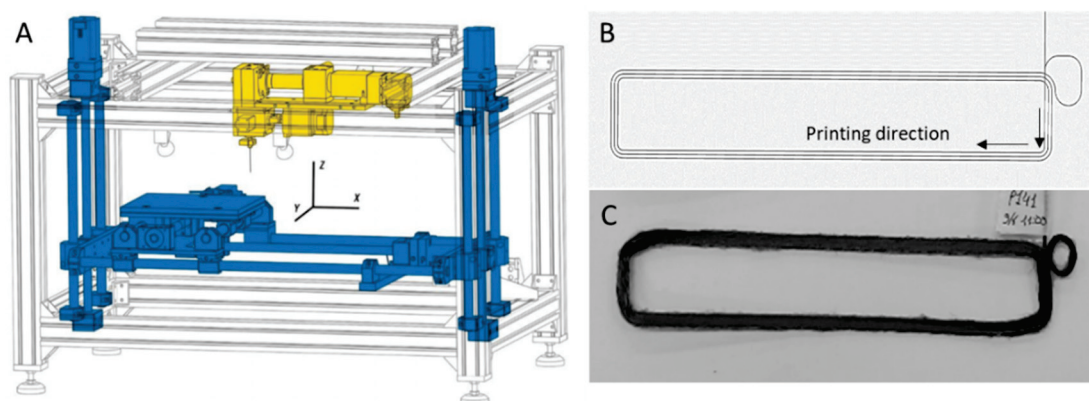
(A) Sketch of in-house FFF printer. The bed and driving system are in blue, and the extruder is in yellow. (B) Top-view sketch of the toolpath of the printed specimens. (C) Actual printed part (printing condition P141 in the Supplementary Materials).
